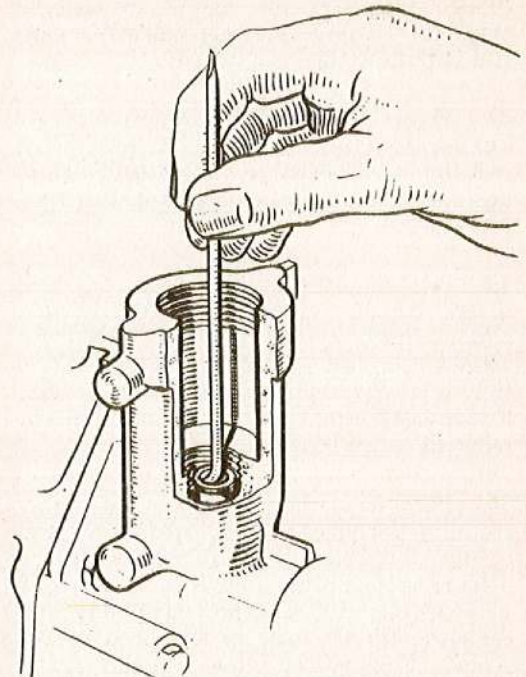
Tool for lifting out shim and rubber seal from reducing valve body
